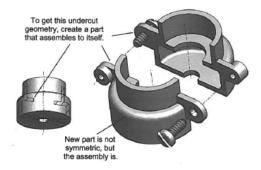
A cylindrical assembly with an undercut. Selfassembling symmetry allows the parts to be identical.
